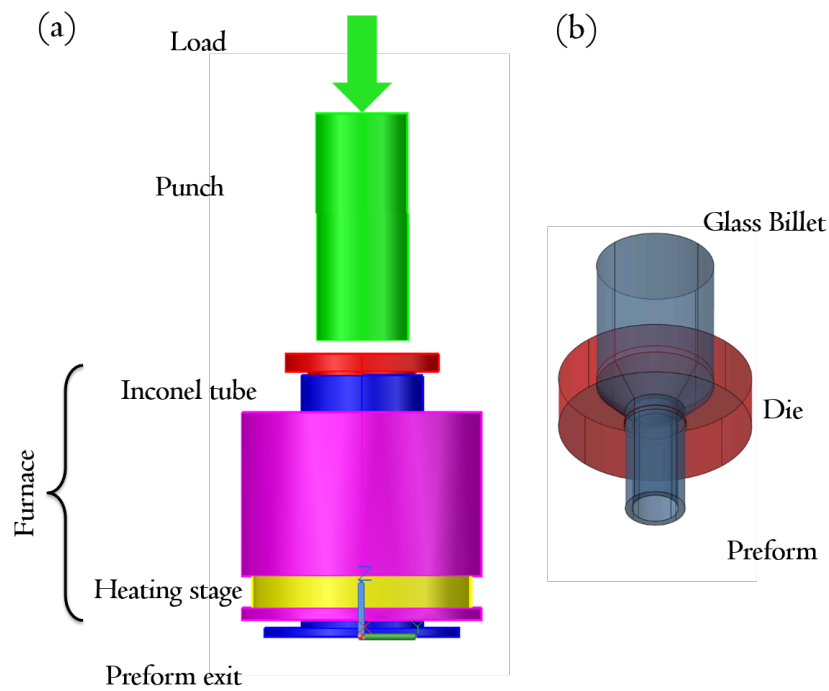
(a) scheme of the extrusion furnace developed in Politecnico di Torino, (b) detail of the extrusion process
